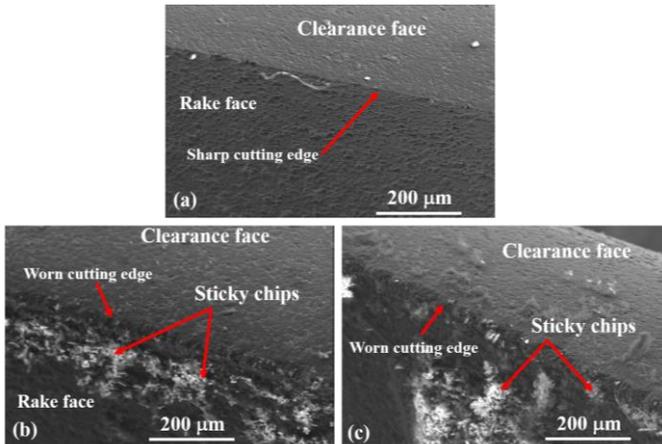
SEM images of cutting edges; (a) before machining and after machining distance of; (b) 1.5 m, and (c) 3.0 m for a spindle speed of 8000 rpm with a feed speed of 500 mm/min
